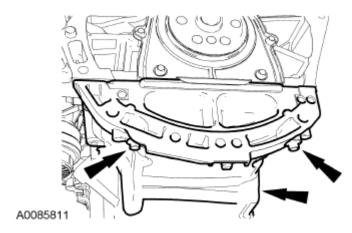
Locating Oil Pan Bolts Courtesy of FORD MOTOR CO.
